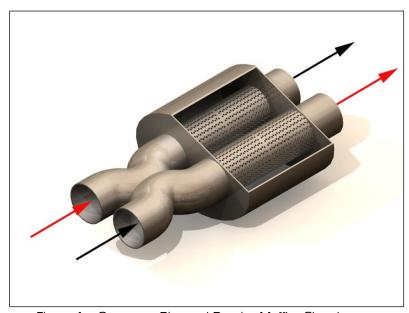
Crossover Pipe and Passive Muffler Chamber
